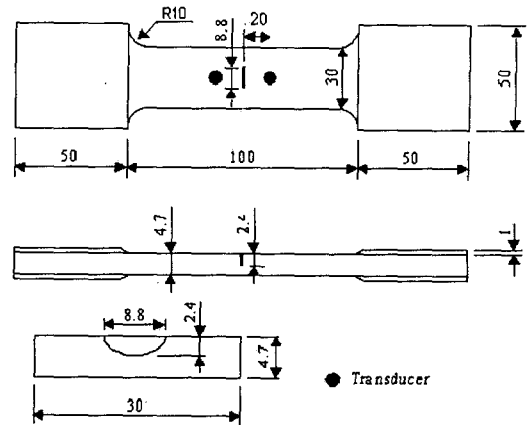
Geometry of the test specimen. All dimensions are in millimeters
